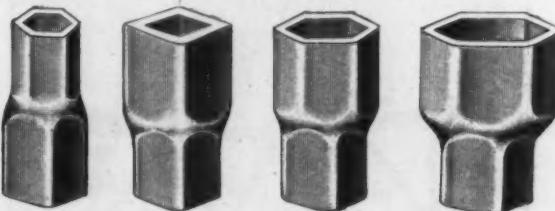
Sockets for Use with Wrench, Both Hexagon and Square Sizes, Also Special Spark Plug Socket.
